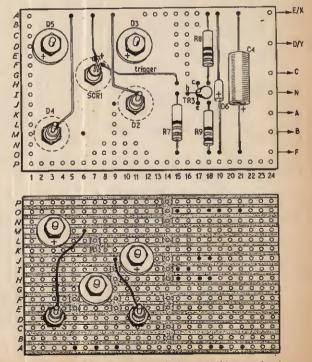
Layout and wiring of the switching and trigger Veroboard panel
